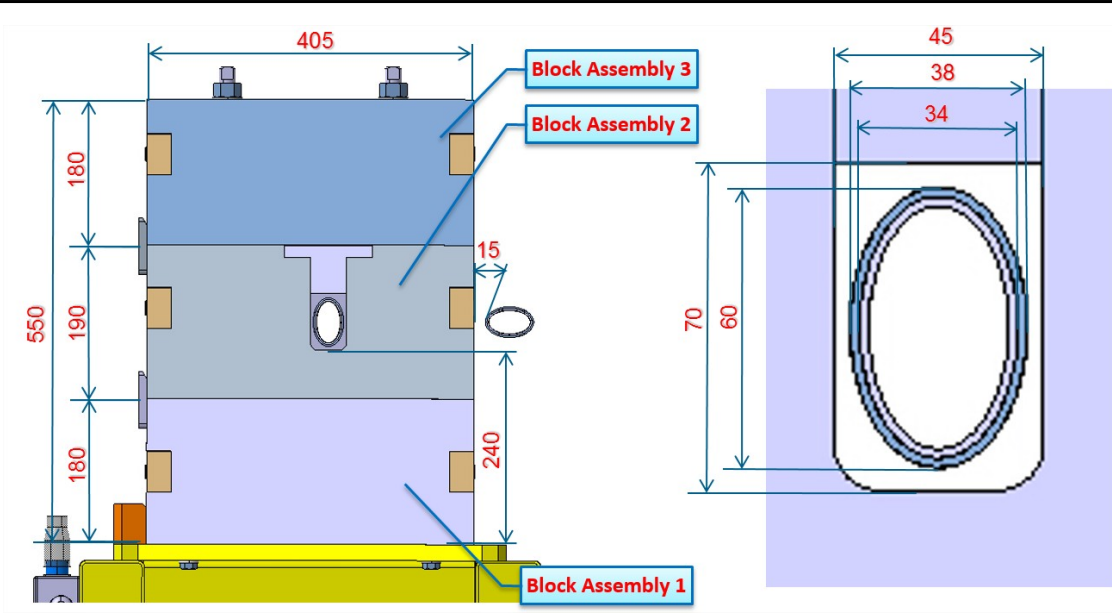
Cross section of the TCAPM, with the vacuum chambers. Dimensions are given in mm. Courtesy of L. Gentini [8].
